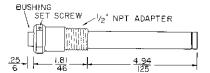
Part No. WEL14A-600R bulb well for liquid immersion applications where the temperature bulb may be removed without draining the tank.
